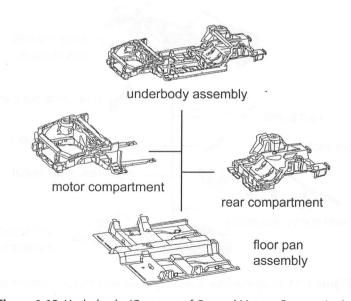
Underbody. (Courtesy of General Motors Corporation)
